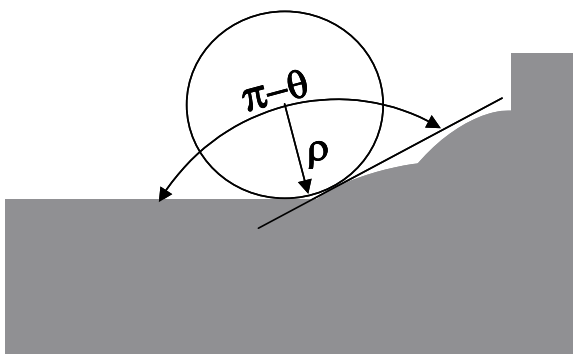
Definition of the radius and the flank at the weld toe
